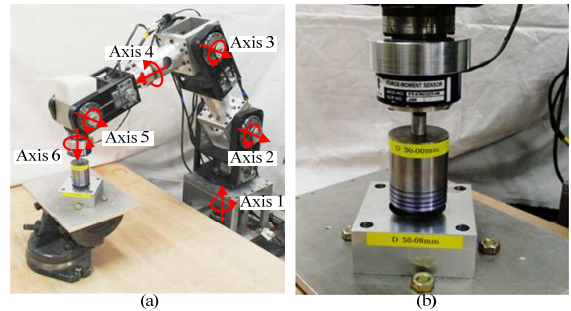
Experimental setup: (a) configuration of manipulator, and (b) assembly parts
